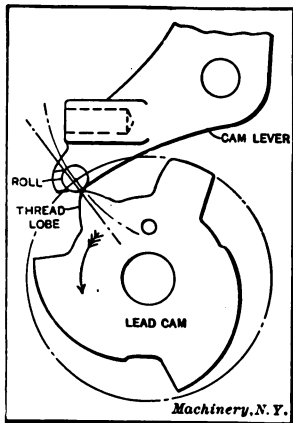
Position of Roll on Thread Lobe when Spindle is reversed
